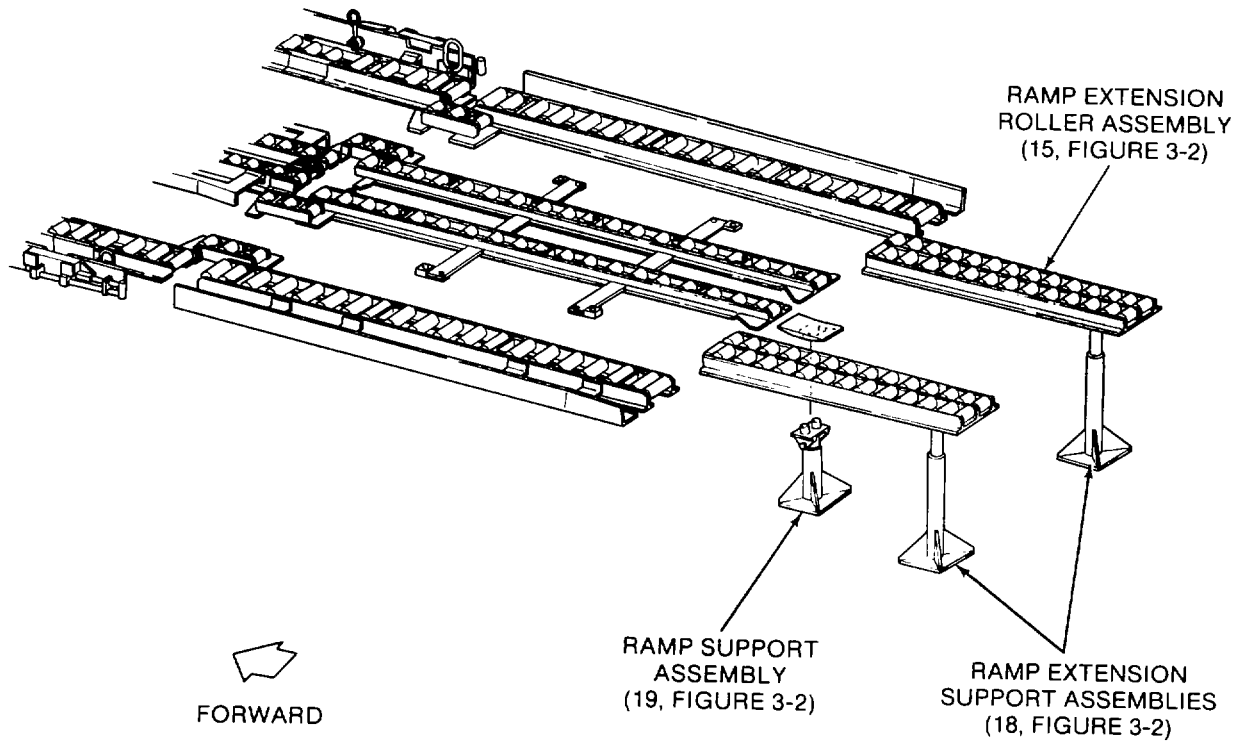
Ramp Extension and Ramp Extension Support Assemblies Installed
